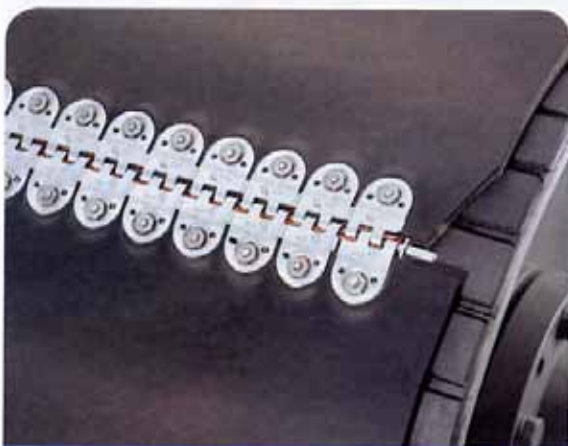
Bolt-hinged fasteners - also well suited for belt conveyors with smaller pulley diameters.
